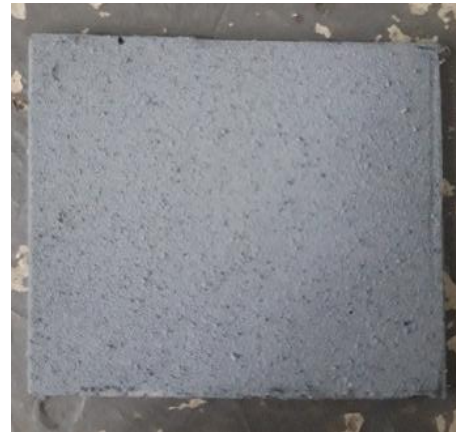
c shows the results of the coating on stainless steel, showing a uniform and smooth surface texture, with a consistent granular pattern. No cracking, flaking, or significant surface defects were observed in the coating layer [20]. This indicates that the coating process proceeded well and produced a neat and stable surface. Overall, the coating results on stainless steel showed good visual quality with adequate uniformity owing to proper surface preparation using a combination of sandblasting and mechanical roughening. This reinforces the effectiveness of the coating in providing a high coating rate on the substrate.
